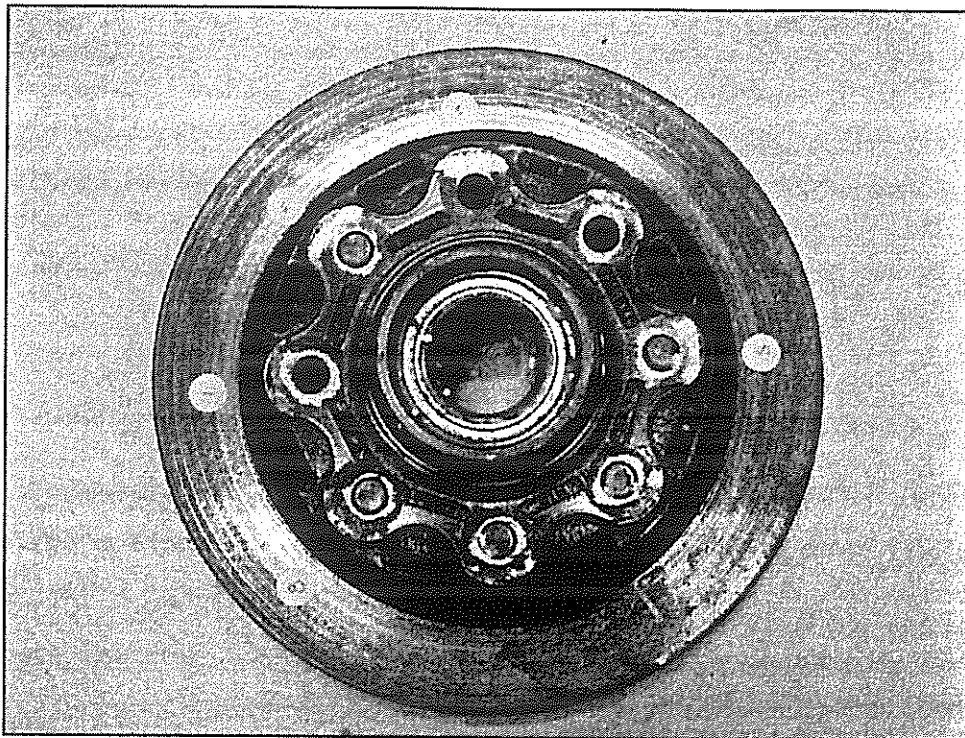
Three of the eight wheel bolts were missing from the rotor assembly – missing bolts were from locations 1, 3 and 4 (*location numbers assigned by DRV personnel*)
